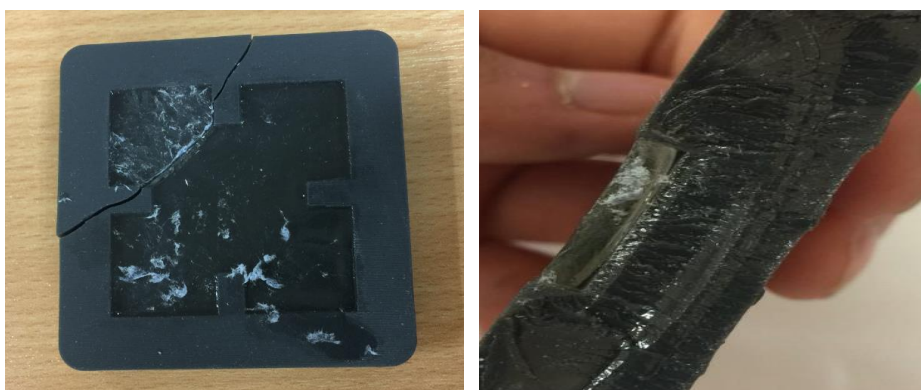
The above mould was made with Flexible Form 2 resin, and fracture was caused by bending when removing the sample.
